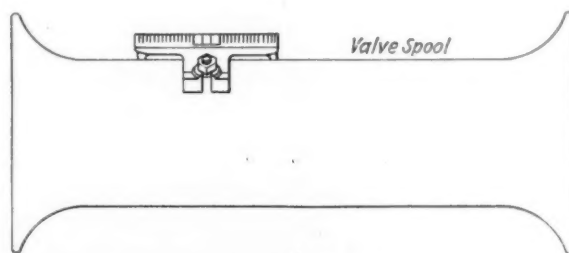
The Abrasive Member Is Fitted and Bolted to the Valve Spool
